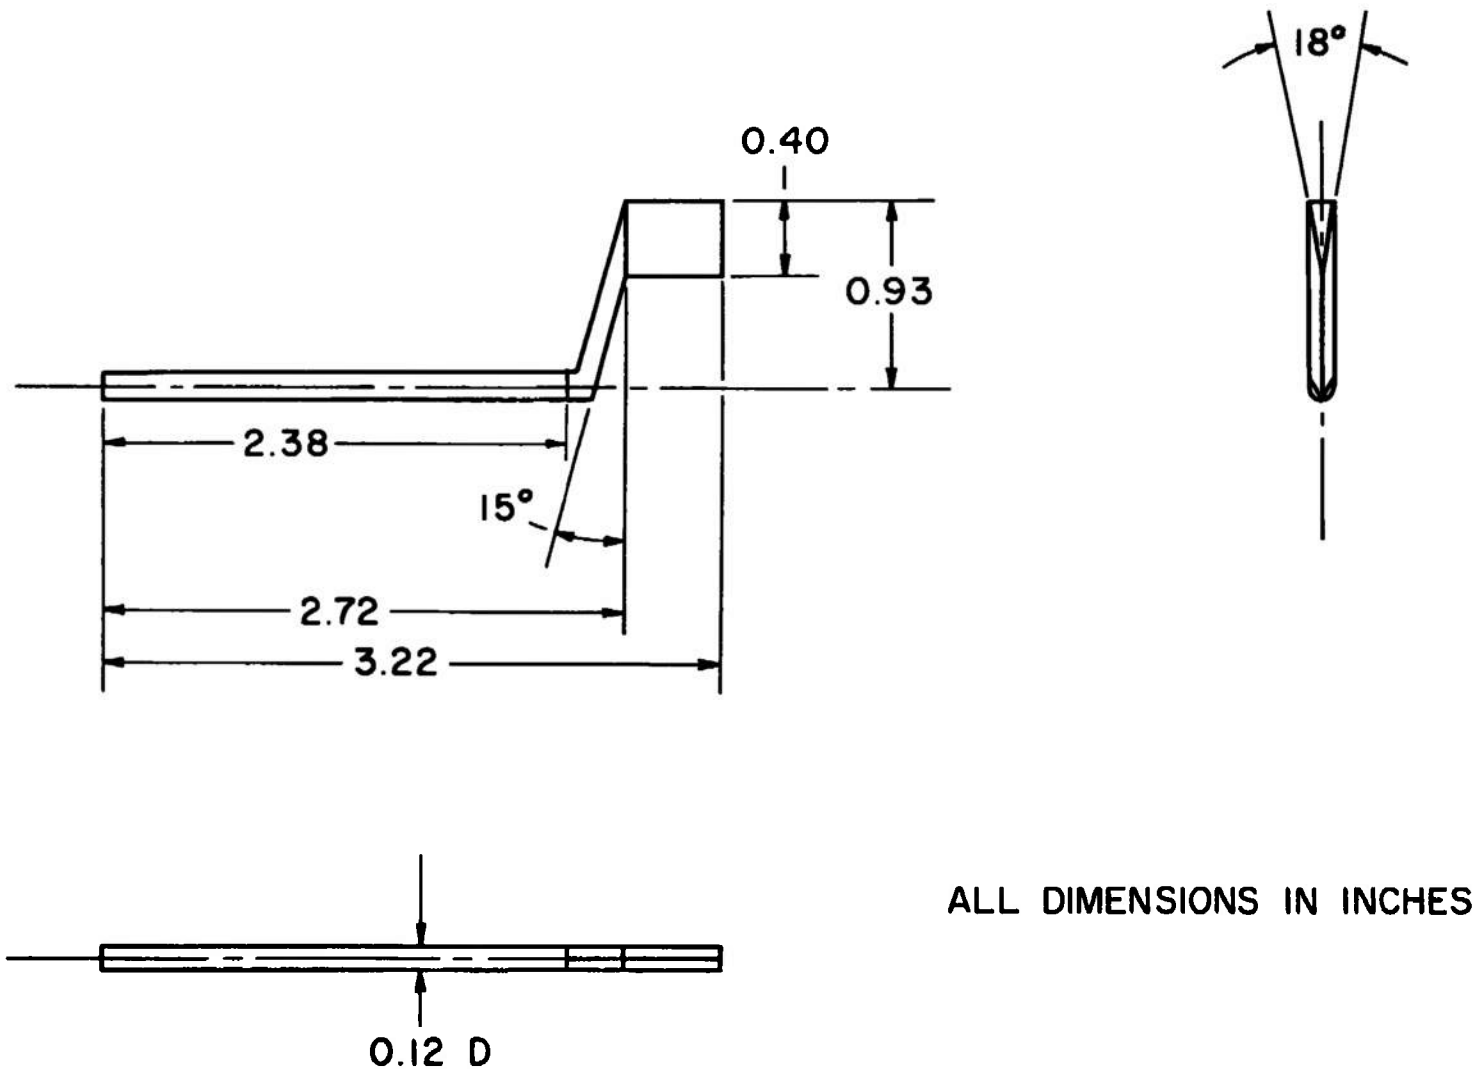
Dimensional Sketch of the Vane-Type Angle-of-Attack Indicator
